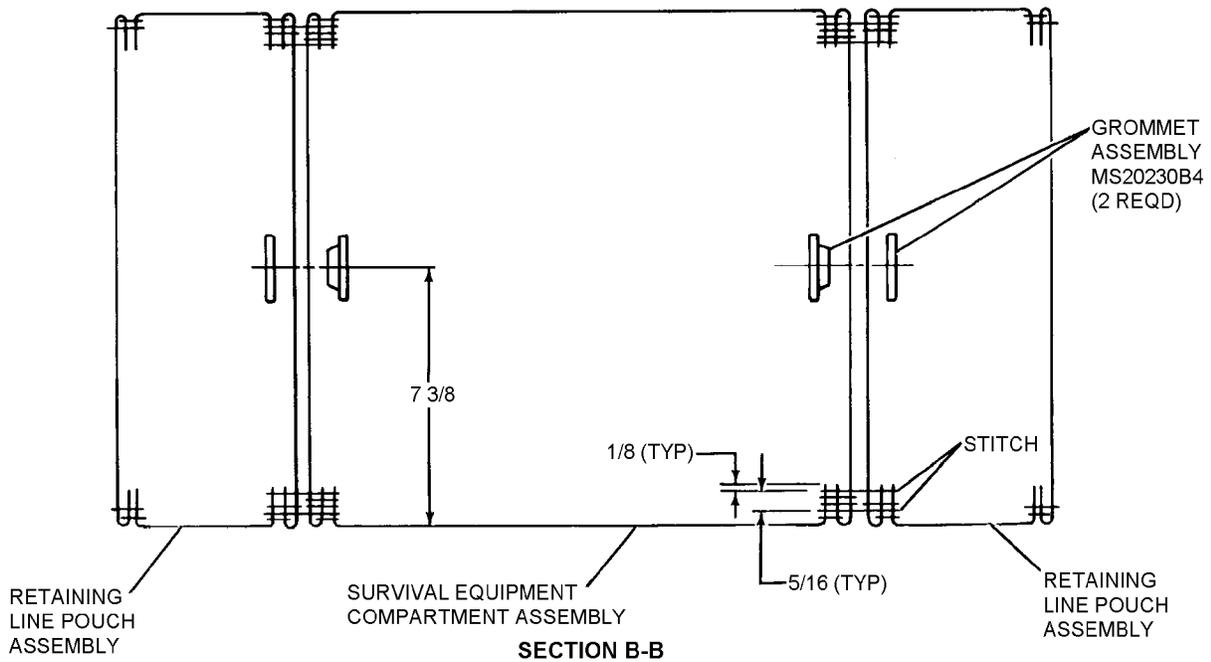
Survival Equipment Container with Pouch Assemblies, SAR Kit (Sheet 1 of 2)
